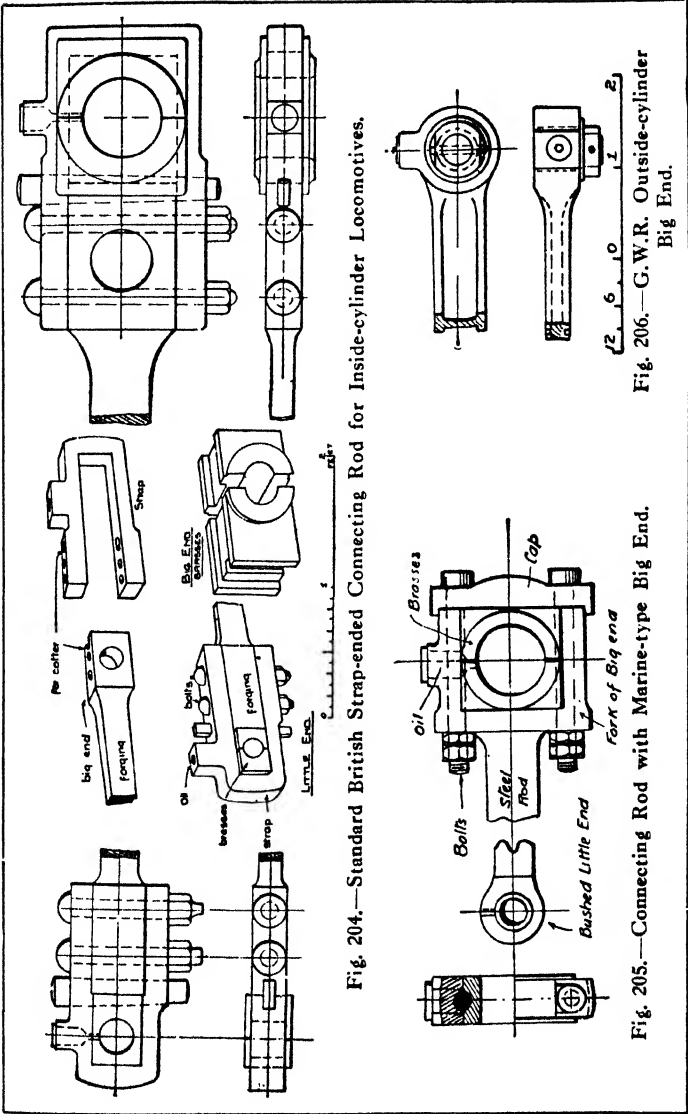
Standard British Strap-ended Connecting Rod for Inside-cylinder Locomotives.
